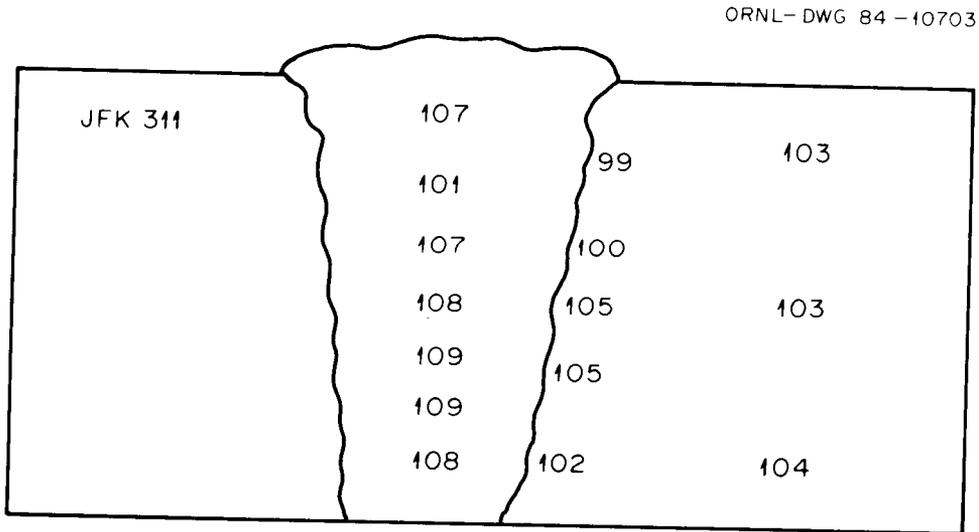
Rockwell B hardness readings across the section of weldment JFK 311.
